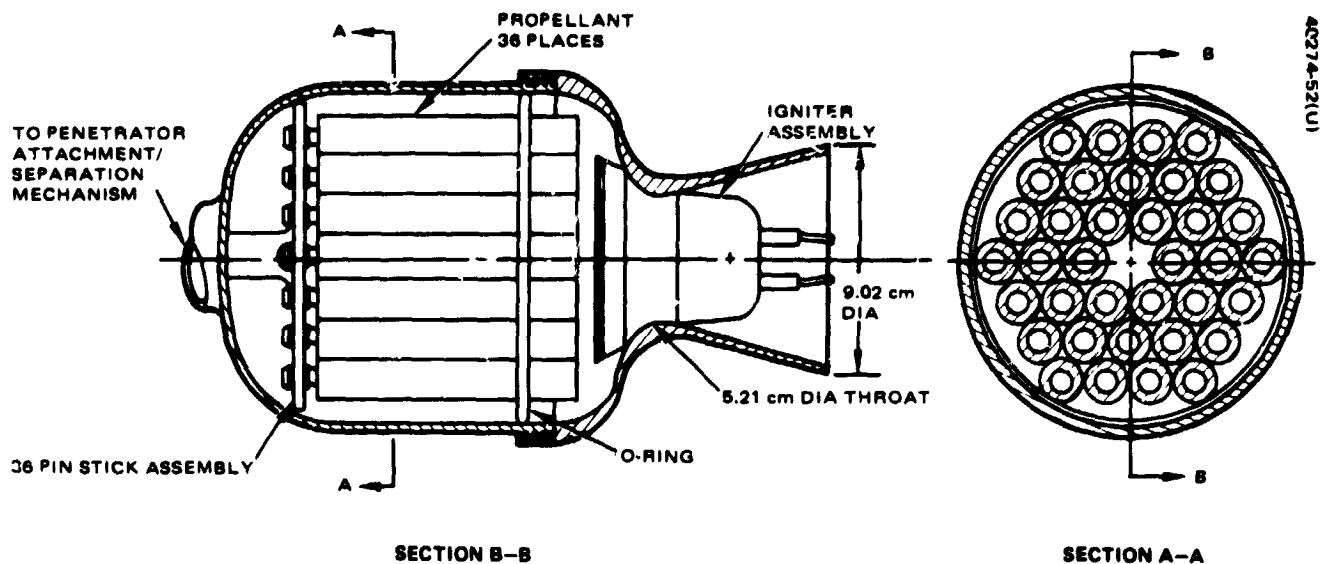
PENETRATOR DEPLOYMENT MOTOR
